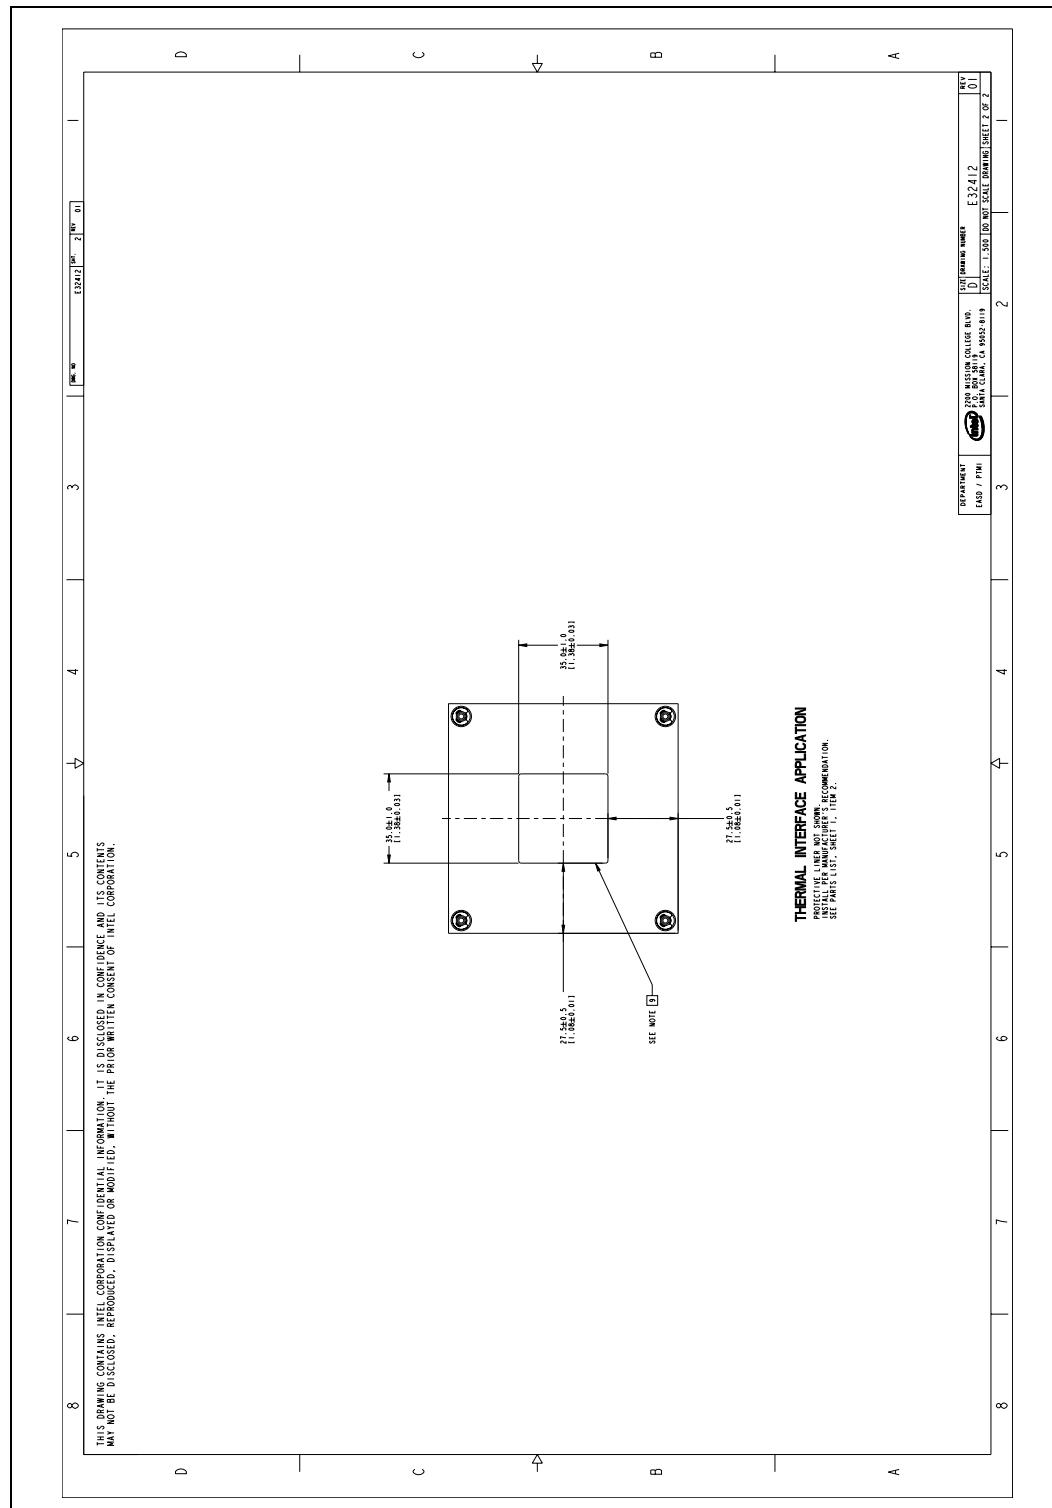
Tower Reference Heatsink Assembly with TIM (Sheet 2 of 2)
